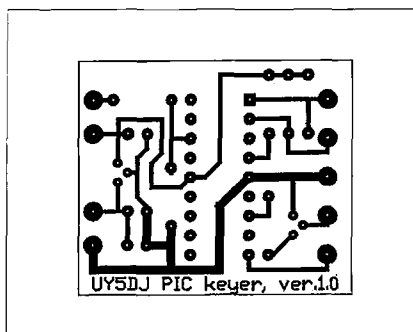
(b). PIC keyer printed circuit board, soldering side.
